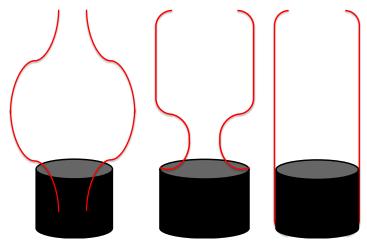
Design alternatives for braid/cap interface. a) braid welded to an etch in the cap. b) braid welded to the underside of the cap. c) braid welded to the side of the cap.
